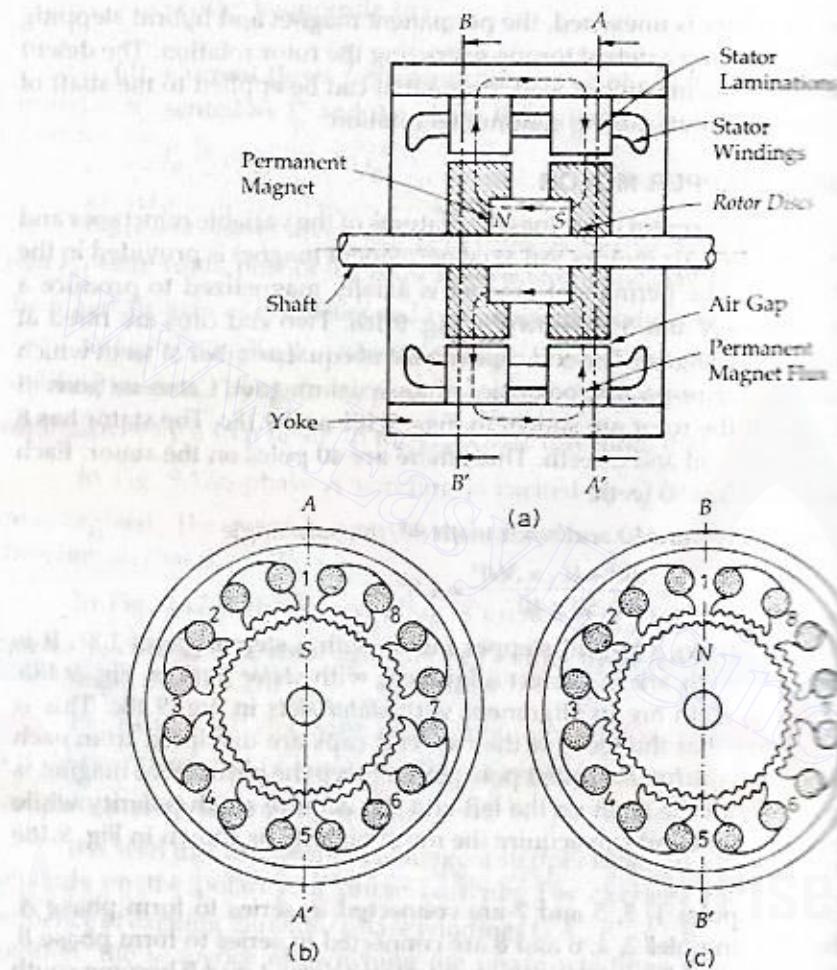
1.8° Hybrid stepper motor (a) Axial view (b) Cross-section AA' (c) Cross section BB'
